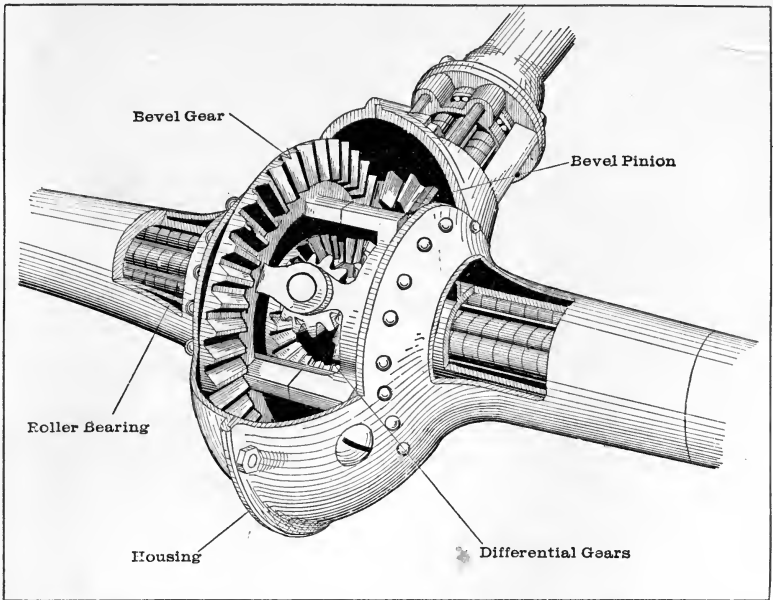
Bevel-Gear Drive Assembly of Ford Light Cars Mounted on Hyatt Flexible Roller Bearings.
